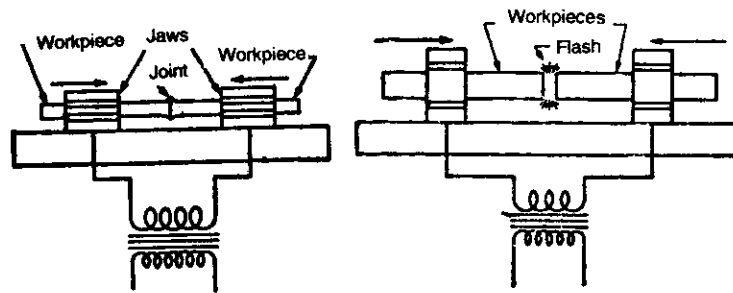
Upset butt welding Figure 9.20 Flash butt welding
